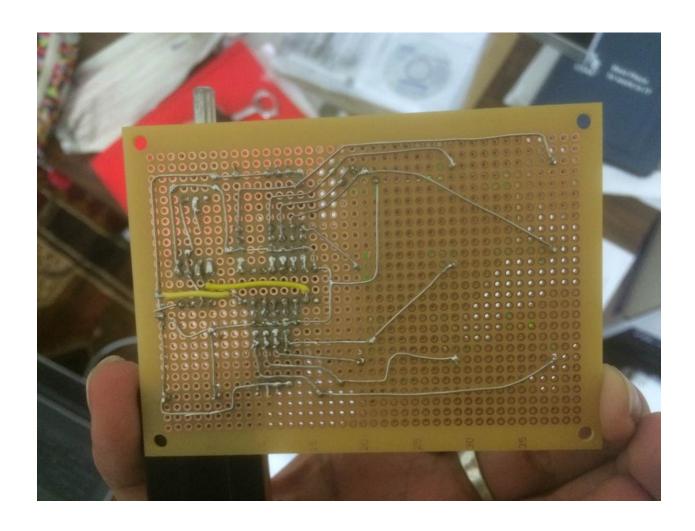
Soldering and circuit underneath the PCB board for 3X3X3 LED cube
